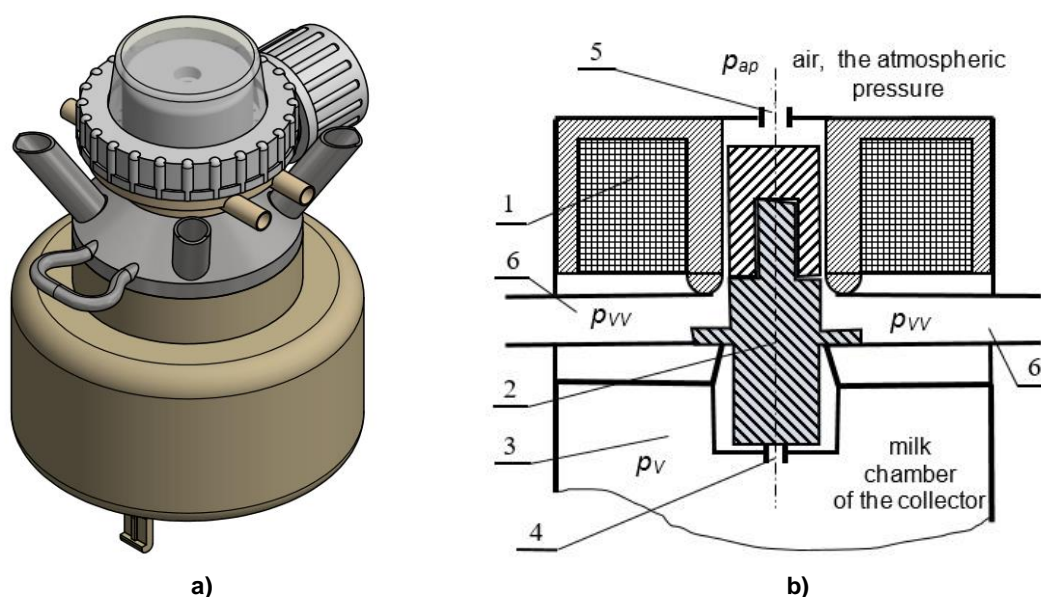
The general view (a) and scheme (b) of experimental pulse generator combined with milking machine collector
